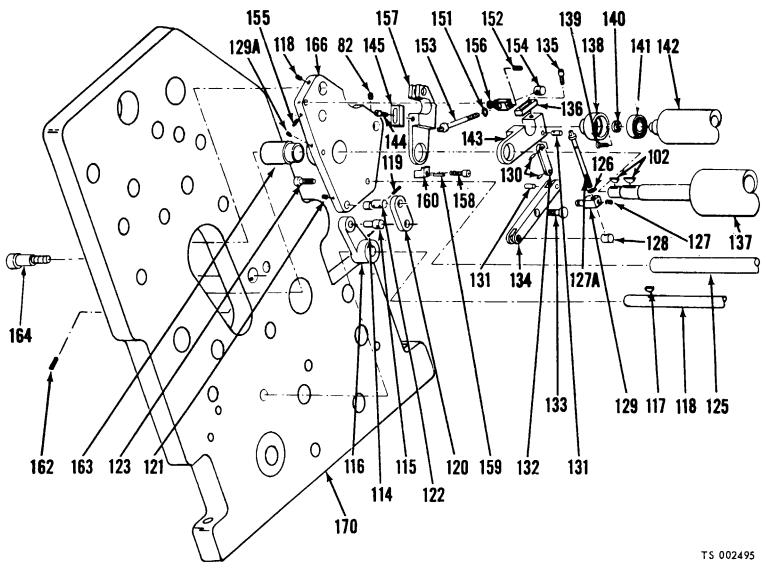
Water motion assembly (Sheet 6 of 6).
